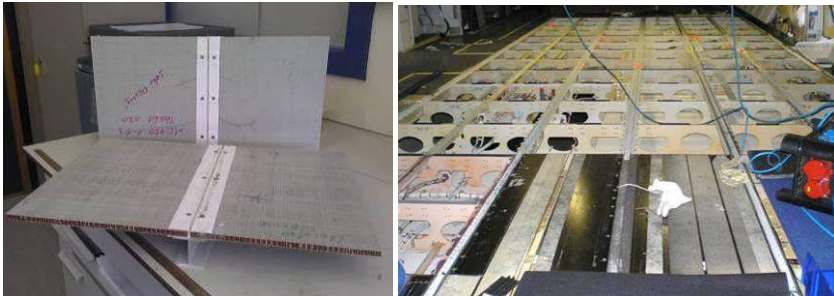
Floor beams with floor panels in the NDT laboratory of the KU Leuven (left), floor beams inside an aircraft (right - Courtesy of Lufthansa).
